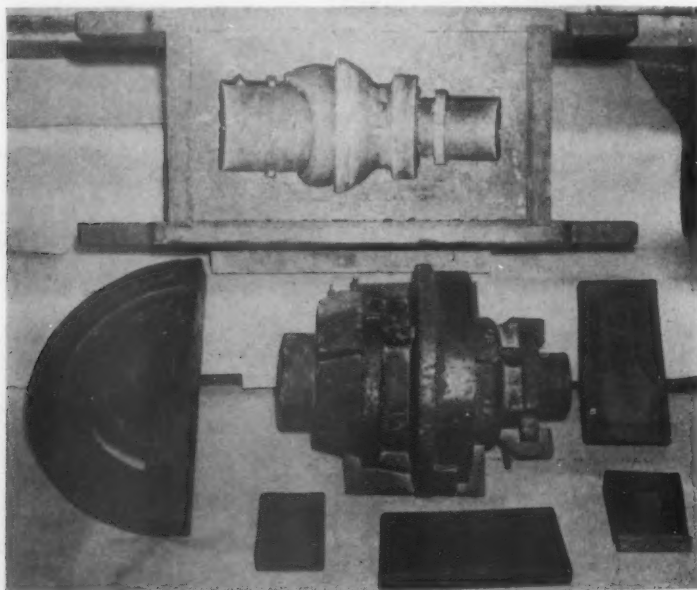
PATTERN AND CORE-BOX EQUIPMENT FOR CASTING PERMANENT DIE MOLDS IN THIS FOUNDRY. fitting in of the locator pins and bushings is all the machine work necessary. The total cost of the complete die is \$46.00.
